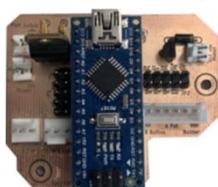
(above): The finished PCB for side 4 with a height of 1.95 in.
